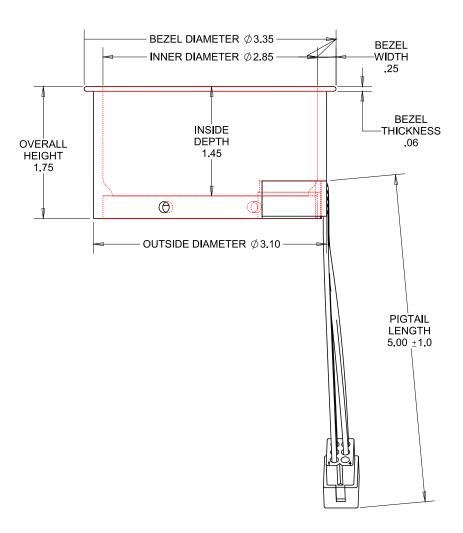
PRIZM Example Cup Holder Dimensions 000-3846-M0795-042
